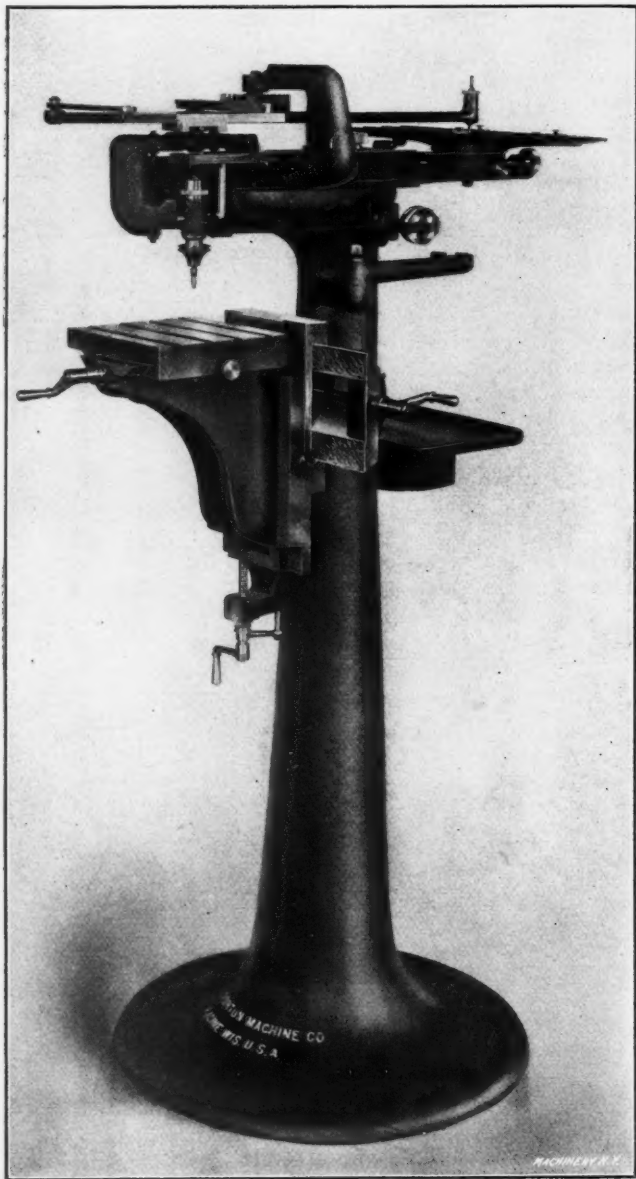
Gorton Engraving Machine adapted to engraving on Rounded Surfaces
